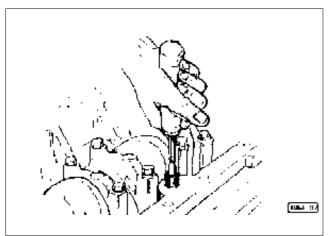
Use a screwdriver to fit the screw plug in the position shown in figure;
